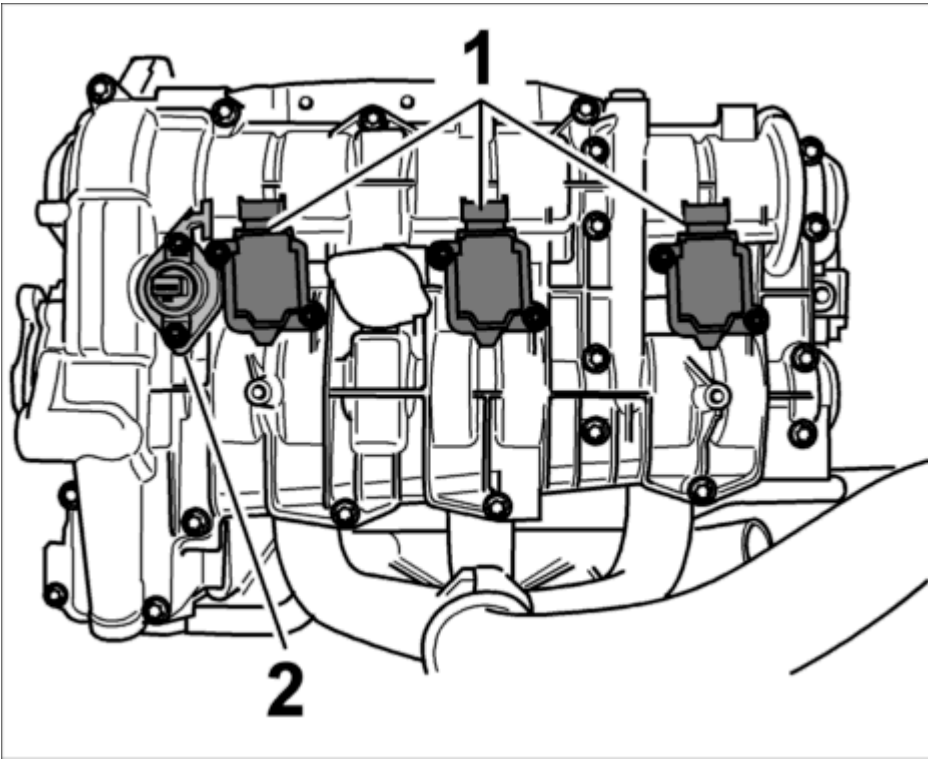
Hydraulic valves for camshaft adjustment and ignition coils
